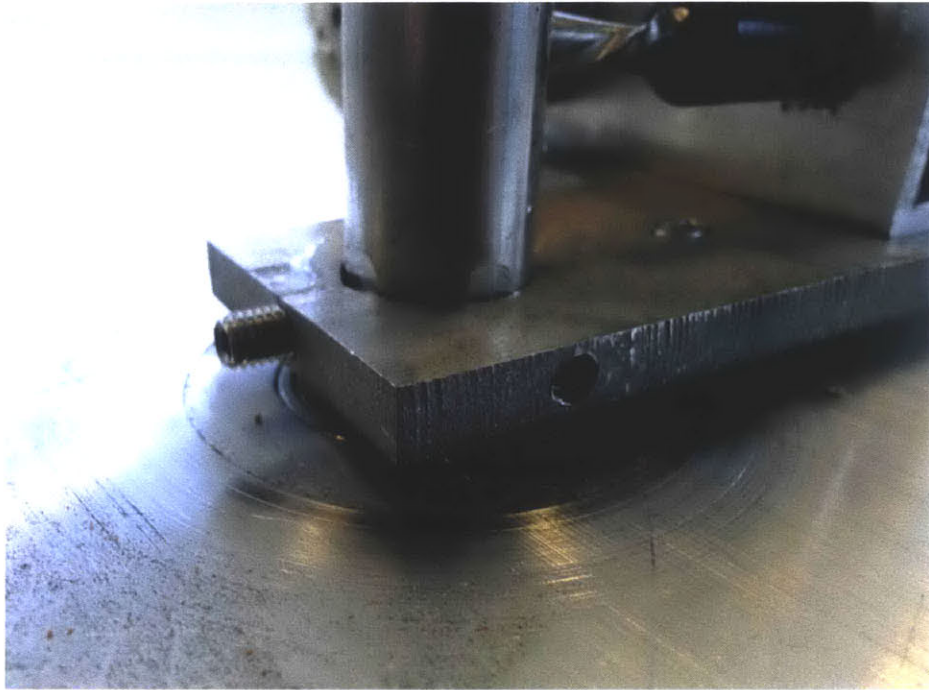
Set screws hold the cutting plate to the pencil sleeve.
